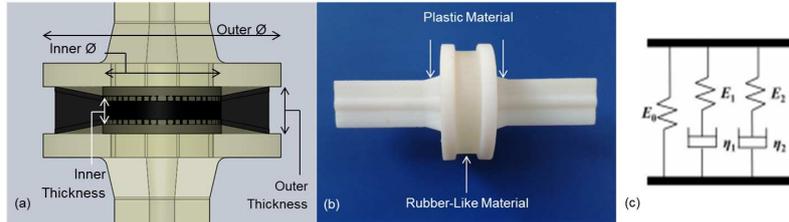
Cross section of SEE CAD model. Inner Diameter=25mm (constant), Outer Diameter=45mm(constant) (b) 3D Printed SEE. (c) diagram of 5 part Weichert model [9].
